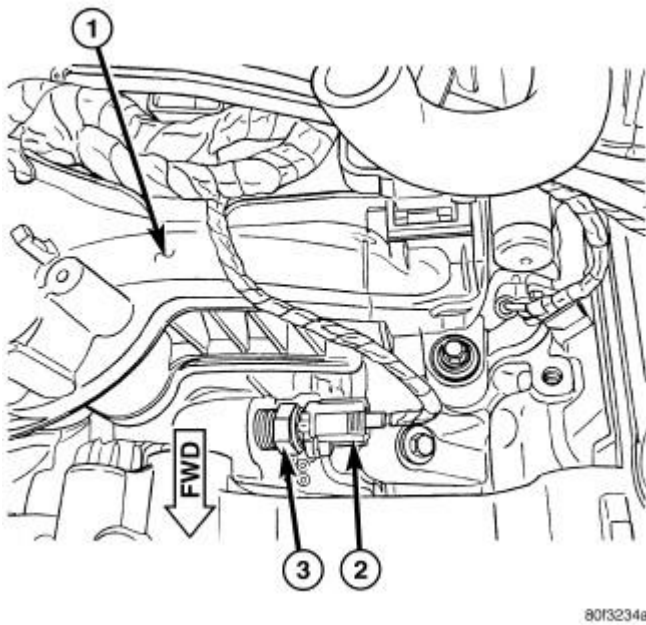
Removing/Installing ECT - 5.7L/6.1L
